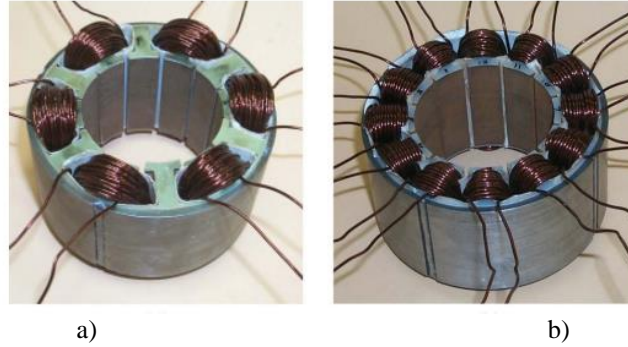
Concentrated winding types; a) Single-layer winding b) Double-layer winding (EL-Refaie, 2010)
